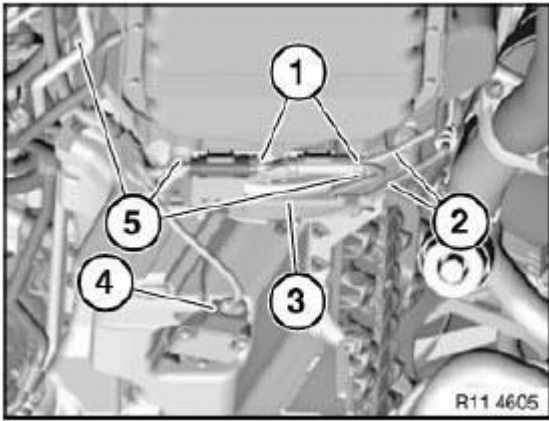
Plug Connections, Holder, Electric Leads And Bolts
